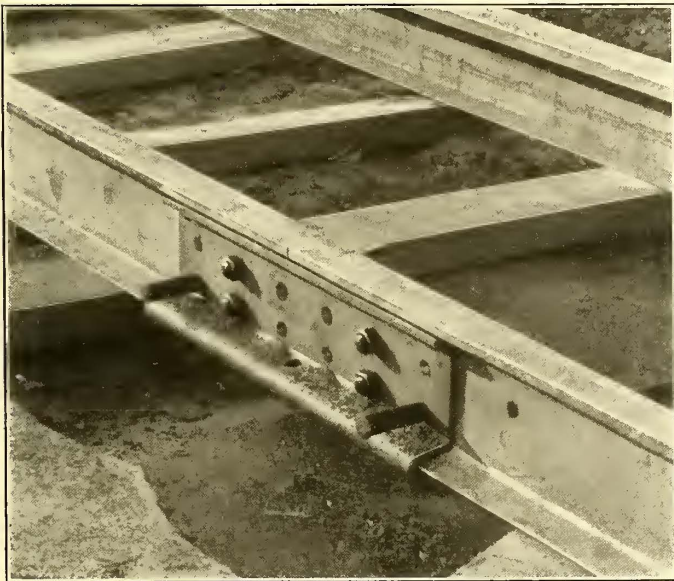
JOINT REAMED READY TO BE RIVETED
